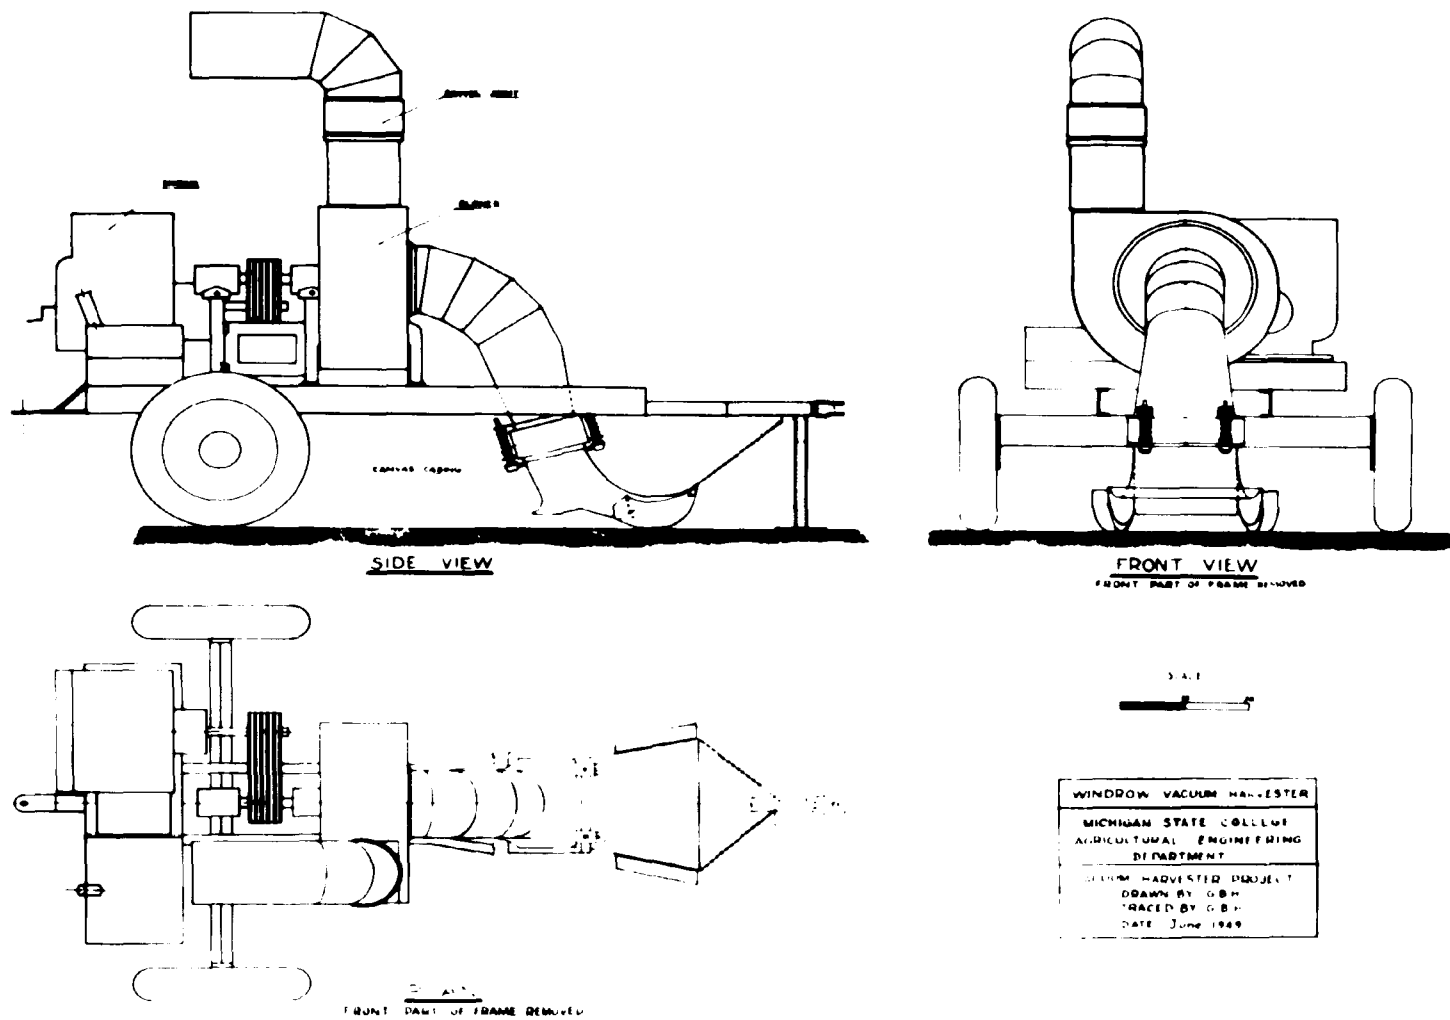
Windrow Vacuum Harvester - assembly drawing.
